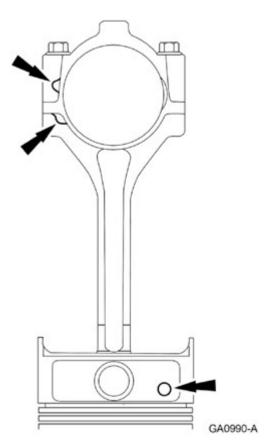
Locating Connecting Rod & Piston Identification Marks Courtesy of FORD MOTOR CO.
